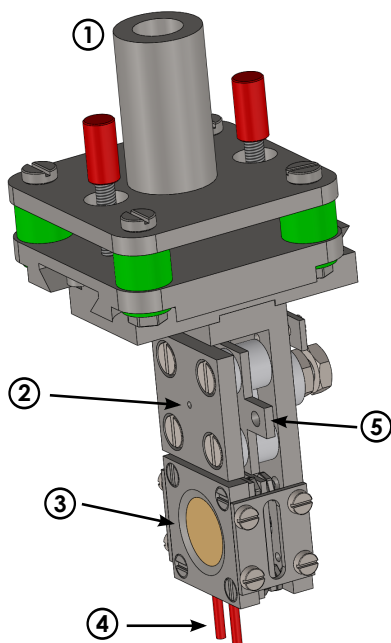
3D CAD drawing of the QCM holder version 2015:
